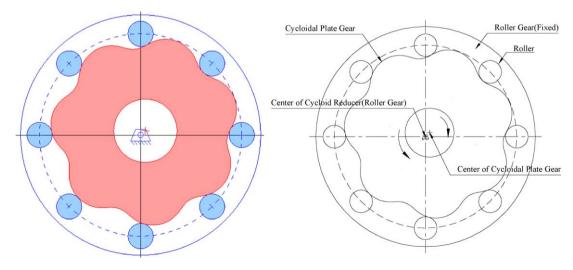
Shape of a stationary ring gear type epicycloid reducer.
